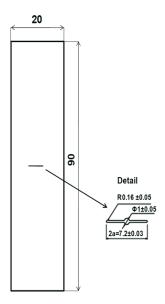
Dimensions and geometry of CCP specimens (in mm).
